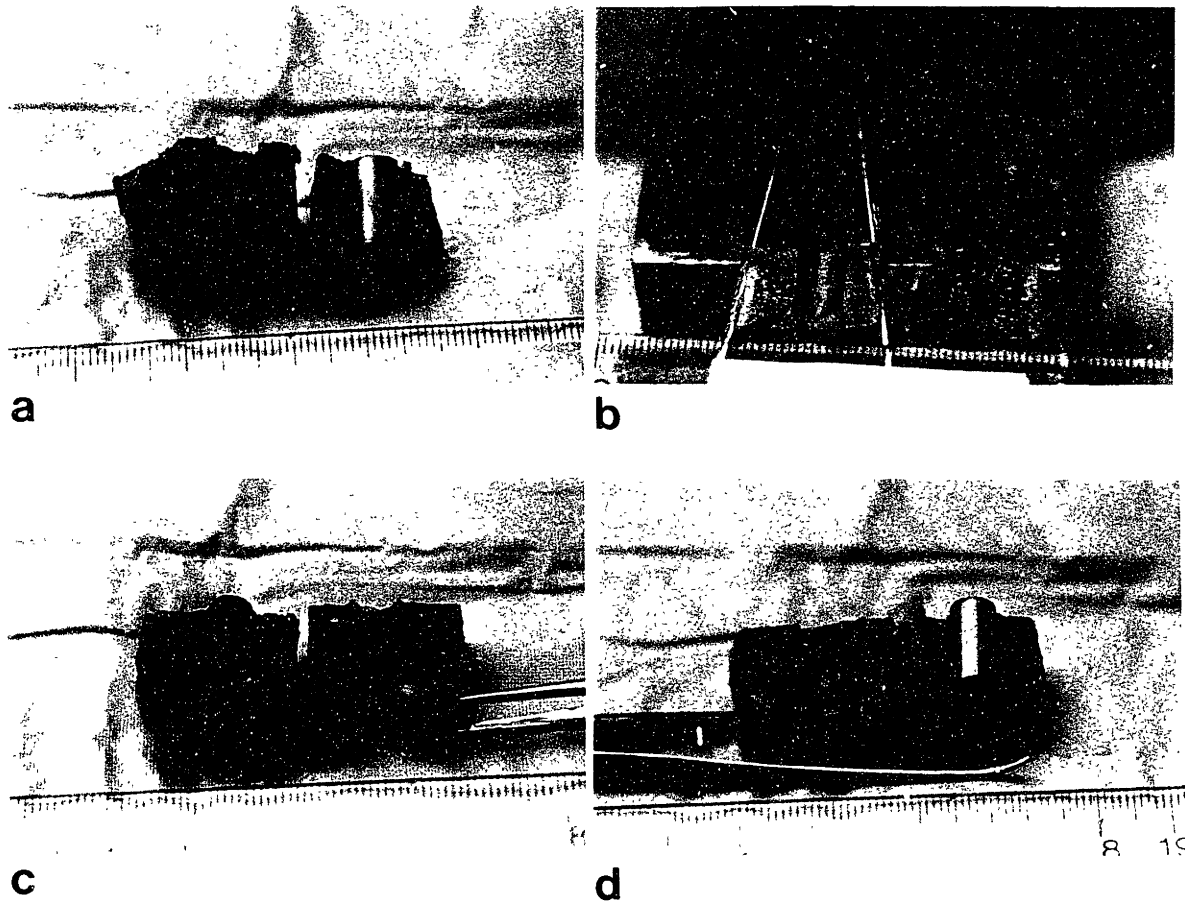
Photographs of fracture faces of mechanical test samples. A - IBAD-HA; B - PSHA; C - annealed-PSHA, D - uncoated Ti-4Al-6V
